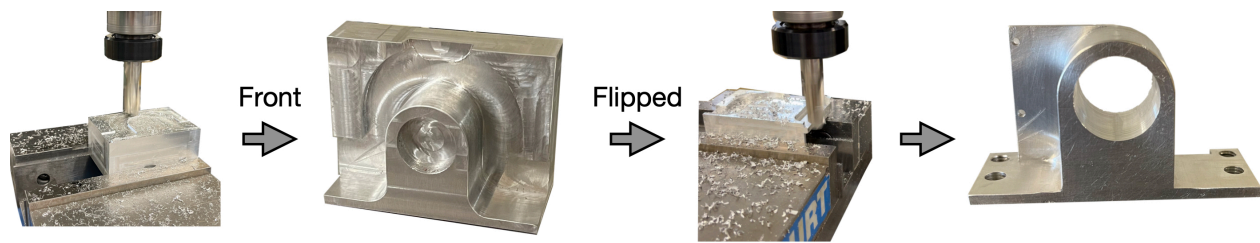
This figure illustrates the overall process of machining the bearing housing. To start with, the aluminum cube is face milled to create the datum face. Then the features on the front of the bearing housing is machined. Next, the aluminum cube is flipped over to machine the features on the backside of the aluminum cube and all the necessary holes needed are drill. Finally, the bearing housing is polished and sharp edges are smoothed.
